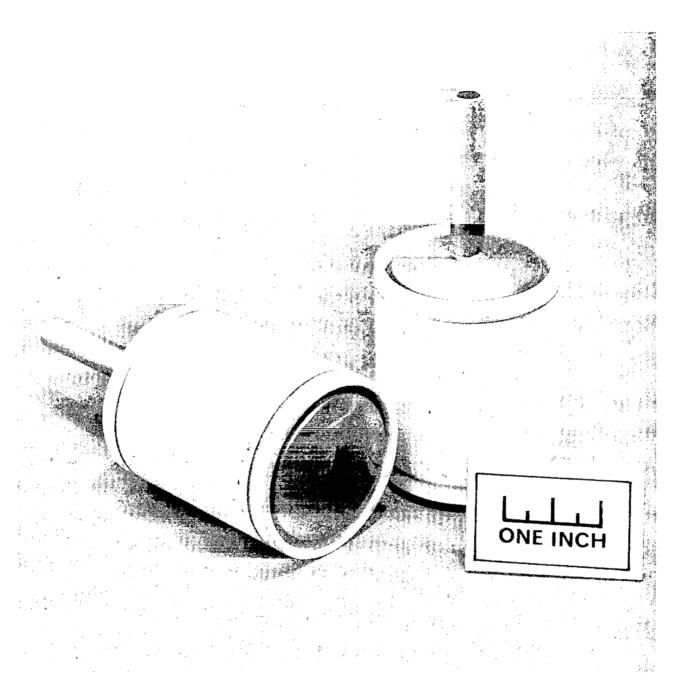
Two-Inch Diameter Thermalox 998 (99.8% BeO) - (Cb-1Zr) Thermal Shock and Vacuum Leak Assemblies Brazed with 60Zr-25V-15Cb Alloy
